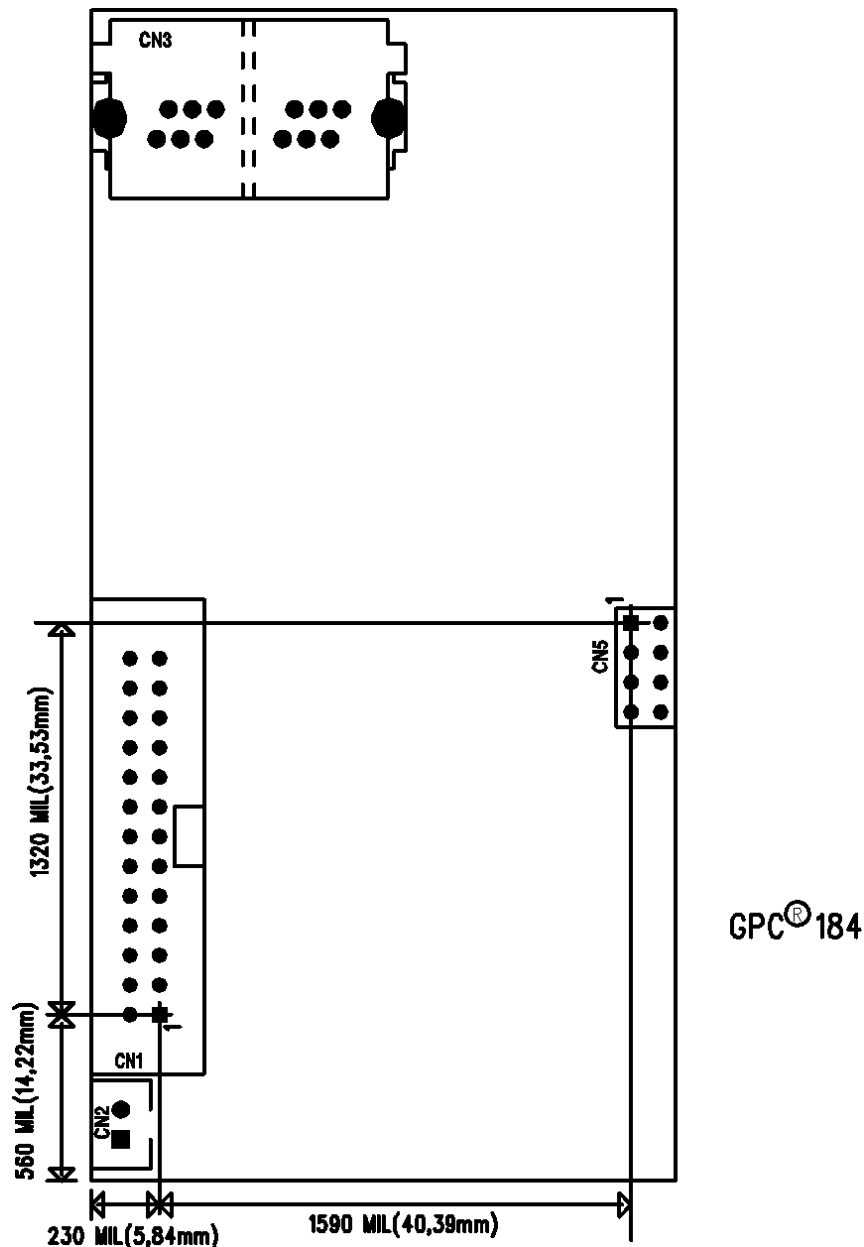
MODULE DIMENSION FOR PIGGY BACK MOUNTING
